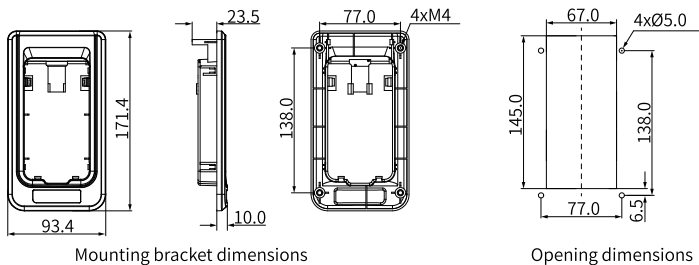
Dimensions and opening sizes (mm) of the MDKE10 mounting bracket
